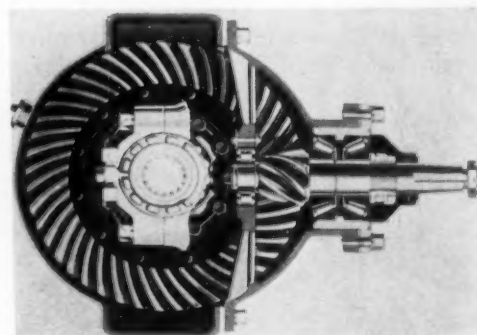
shows a 13-in. spiral bevel assembly with nine important parts, and Fig. 11 shows a two-speed double reduction with 15 important parts of NE steel carburized and hardened.
